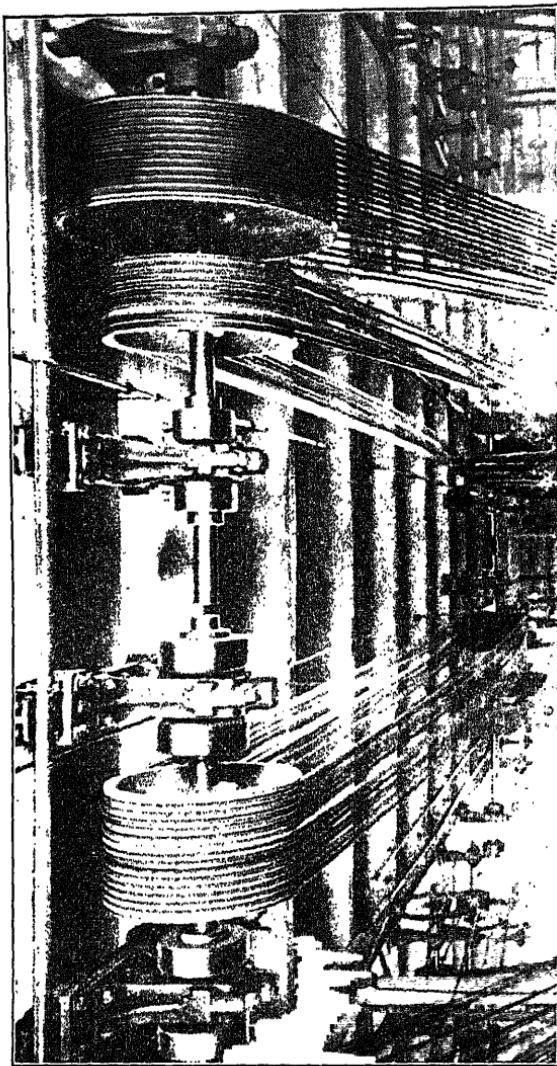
Rope drive in a cotton mill in Canada. Transmission Ball Bearing Co. Buffalo.
